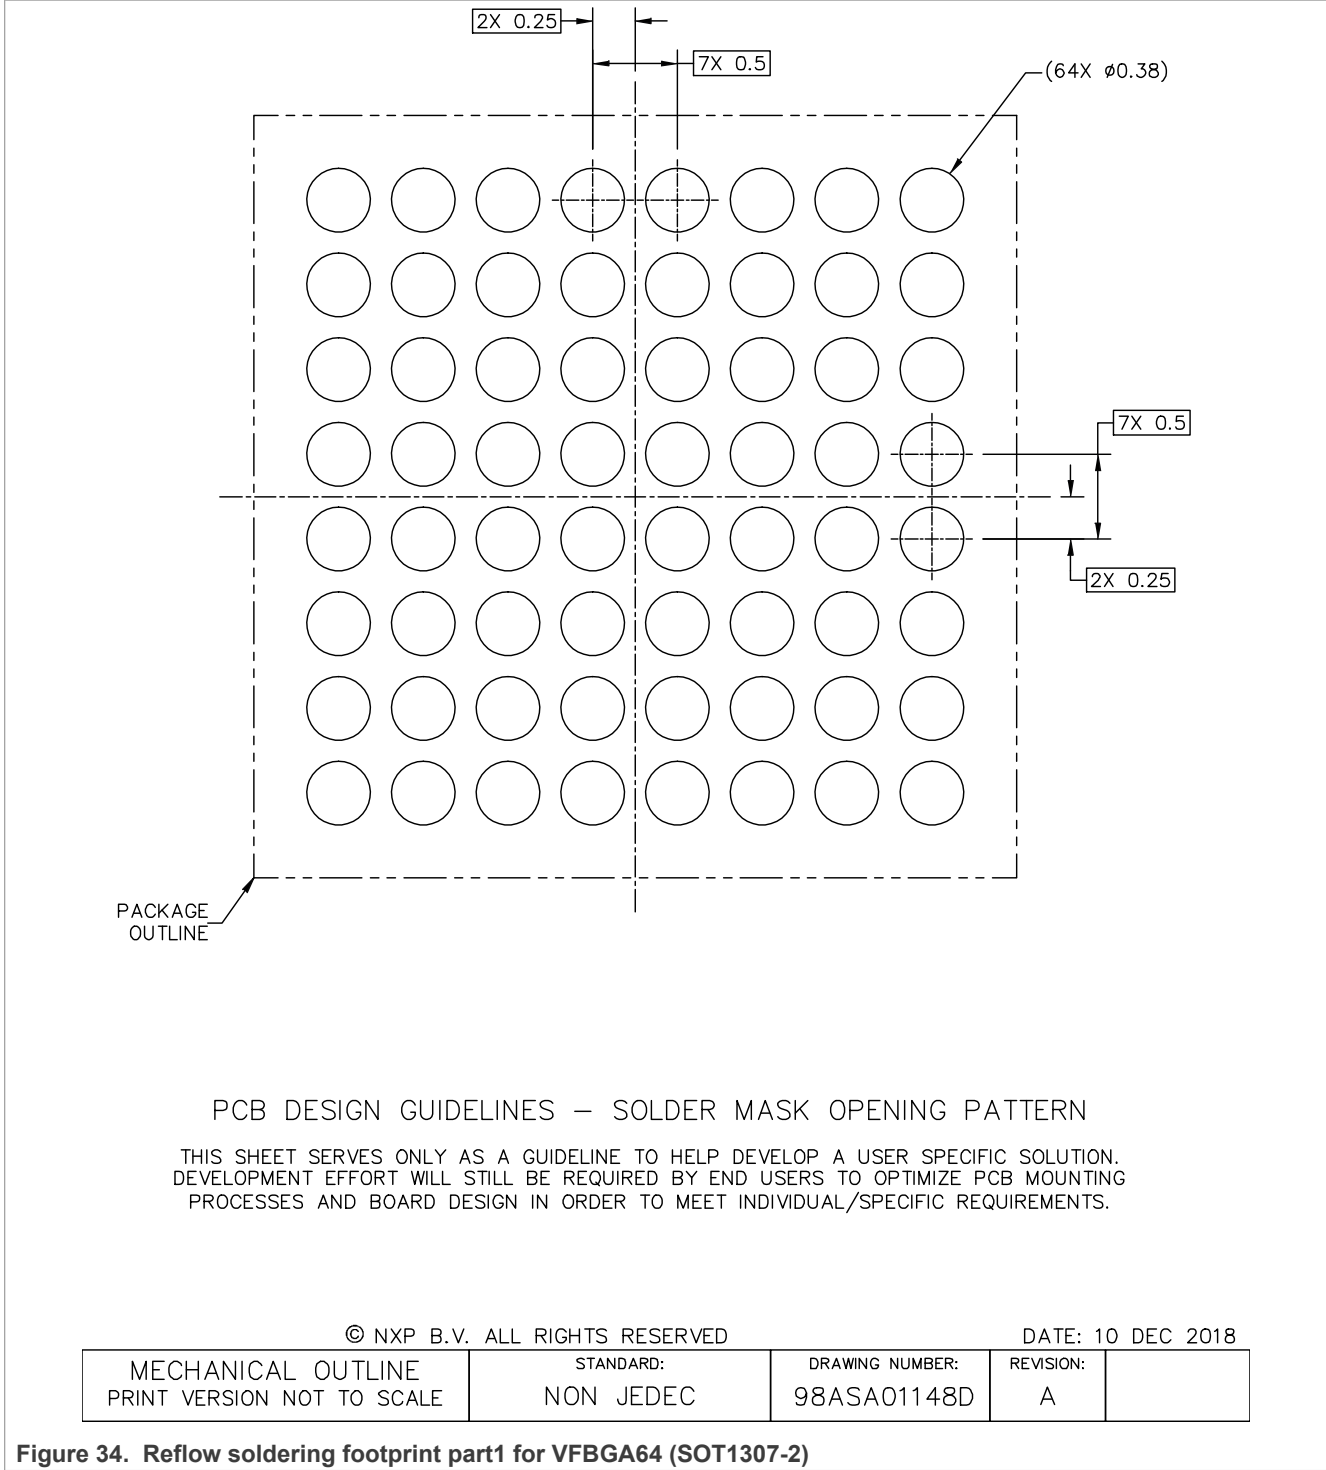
Reflow soldering footprint part1 for VFBGA64 (SOT1307-2)
